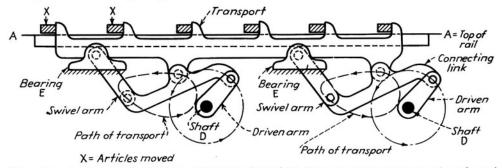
Here is shown a simple form of link motion which imparts a somewhat egg-shaped motion to the transport. The forward stroke is almost a straight line. The transport is carried on the connecting links. As in design in Fig. 422, the shafts D are driven in unison and are supported in the frame of the machine. Bearings E are also supported by the frame of the machine, and the rail AA is fixed. The details of operation can be understood readily from the figure.
